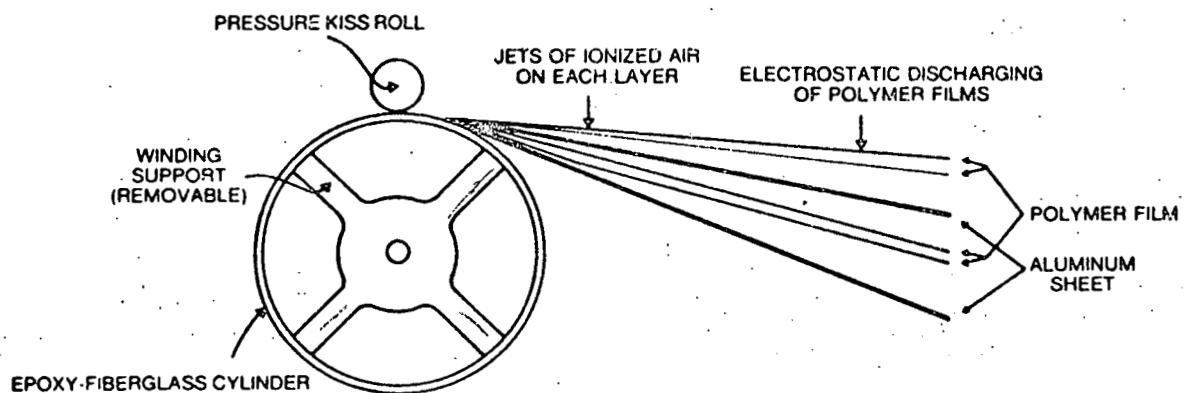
Schematic drawing of the winding of a "capacitor type" test sample
